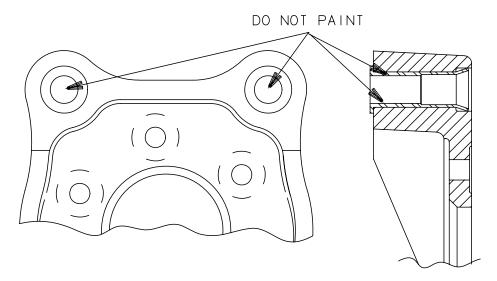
Typical Torque Plate (Cast), Painted Surfaces
